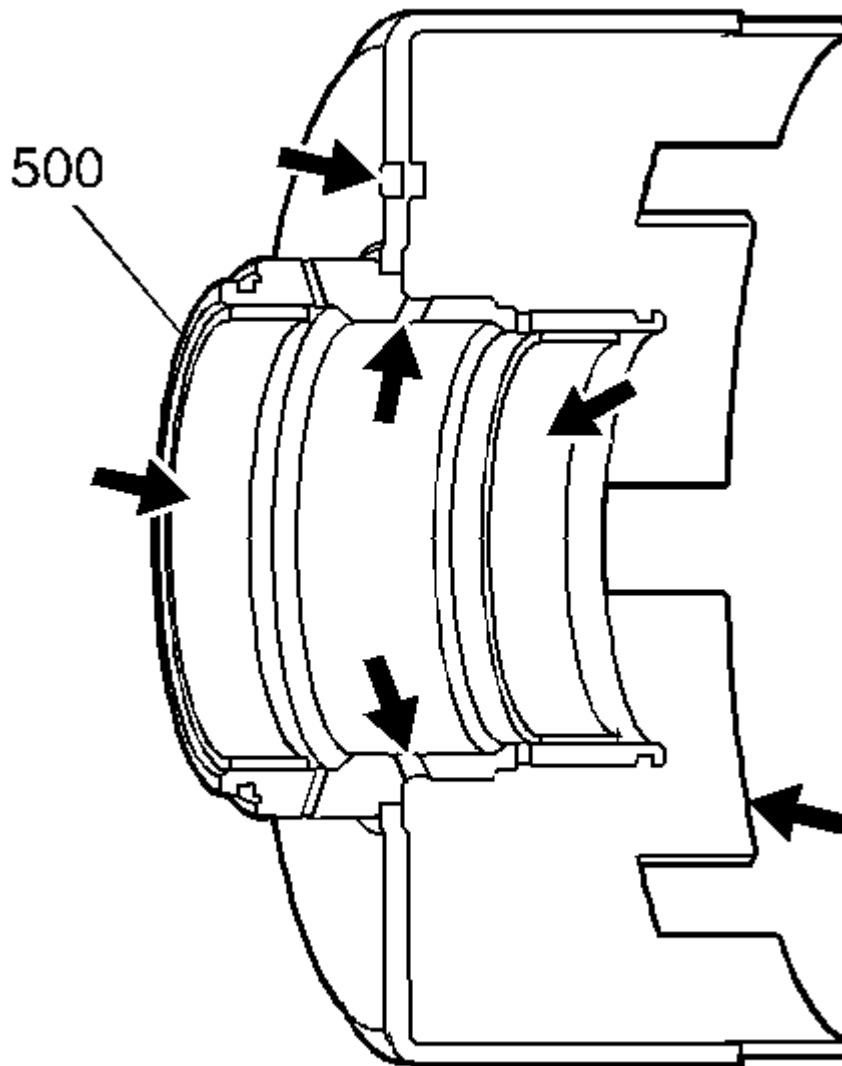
Identifying Inspection Areas On Reverse Clutch Housing
